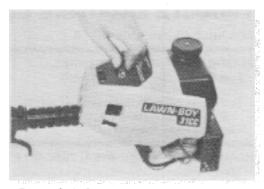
Slide Cover forward on Boom as Starter Handle is tucked thru opening. Remove Cover.
